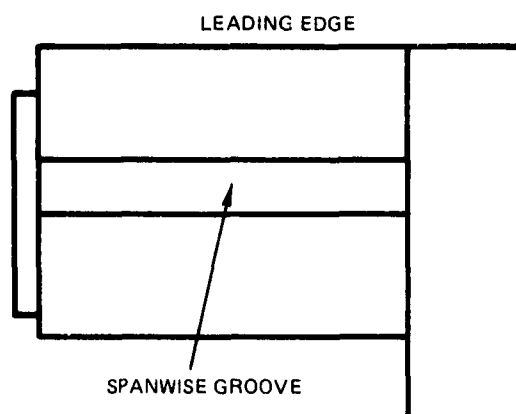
Plan View of Blade Showing Spanwise Groove
